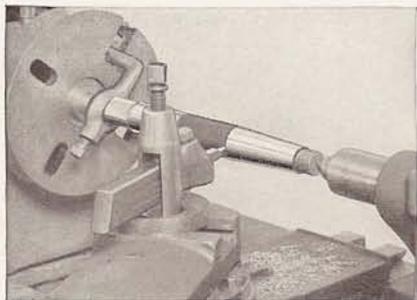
Turning a Taper on a Shaft in the 9-inch "Workshop" Lathe.
